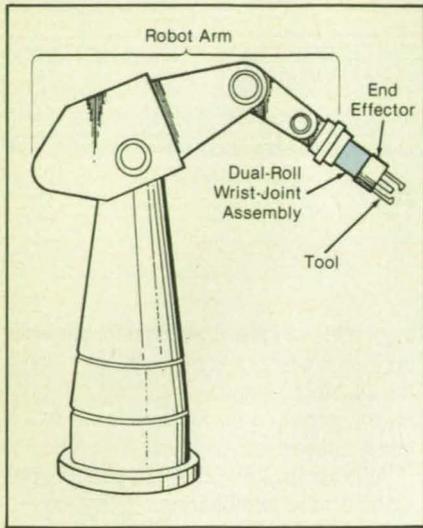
The Dual-Roll Wrist-Joint Assembly is mounted on the end of a robot arm.
